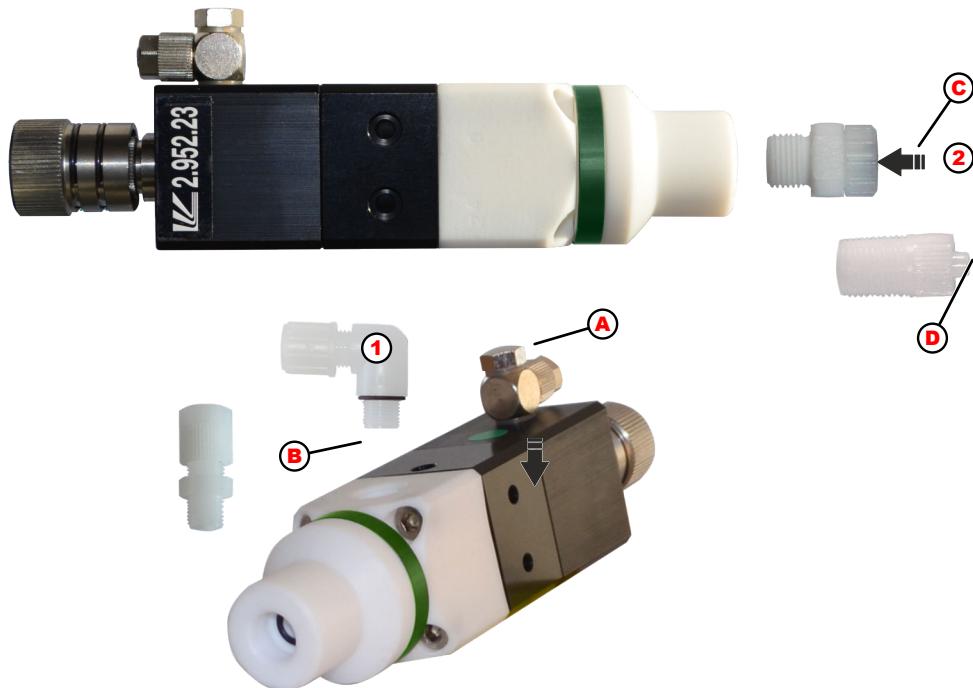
EP and EP-FD dosing valves 295218, 295219, 295223: Connections for product inlet and outlet (fig. example with valve 295223)
